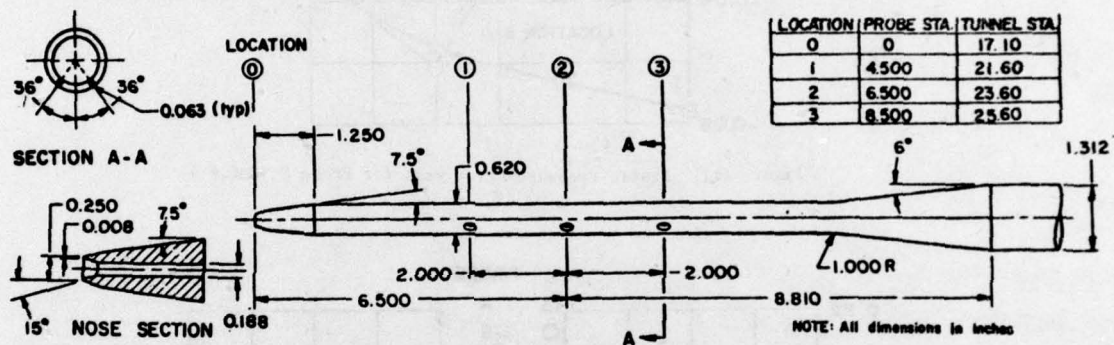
Details and Dimensions for Probe E (Ref. 6)
